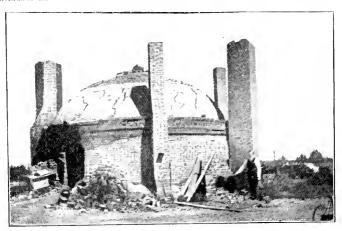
Round down-draft kiln, five arches, with chimneys outside; capacity 60,000 brick.
